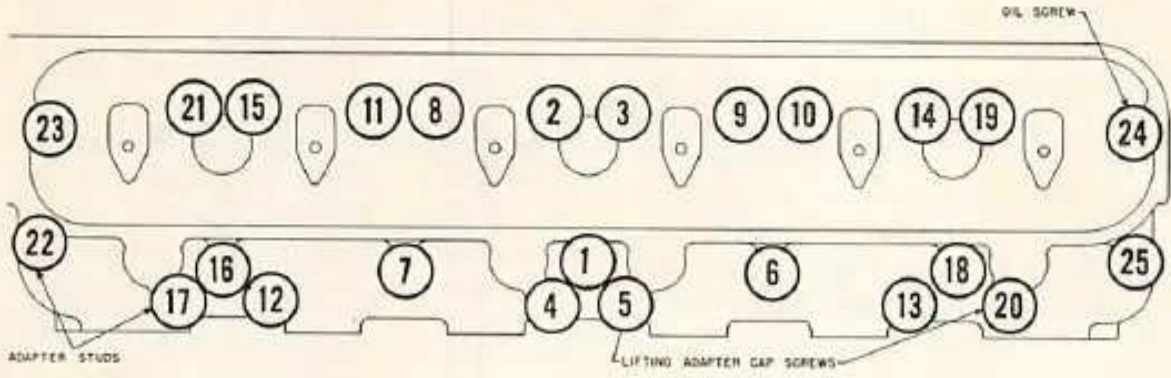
Cylinder head cap screw tightening sequence for Series 1600 diesel engines. Tighten the oil cap screw (24) to a torque of 96-100 Ft.-Lbs. and all other cap screws to a torque of 112-117 Ft.-Lbs.
